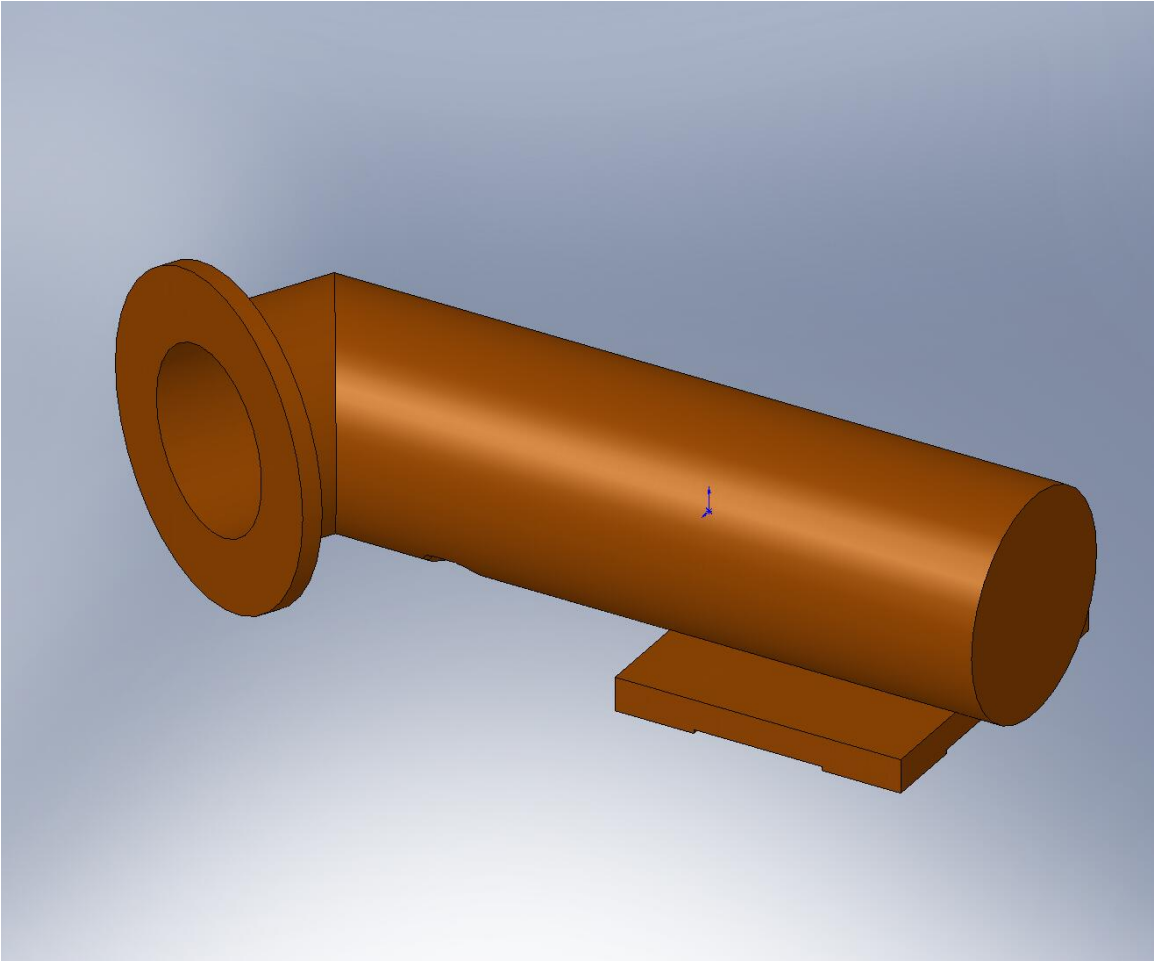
Connector Tube proposed for the High Crossbeam concept. It is mostly similar to the Low Crossbeam design, except for the mounting plate detail and the notch shown in Figure 38.
